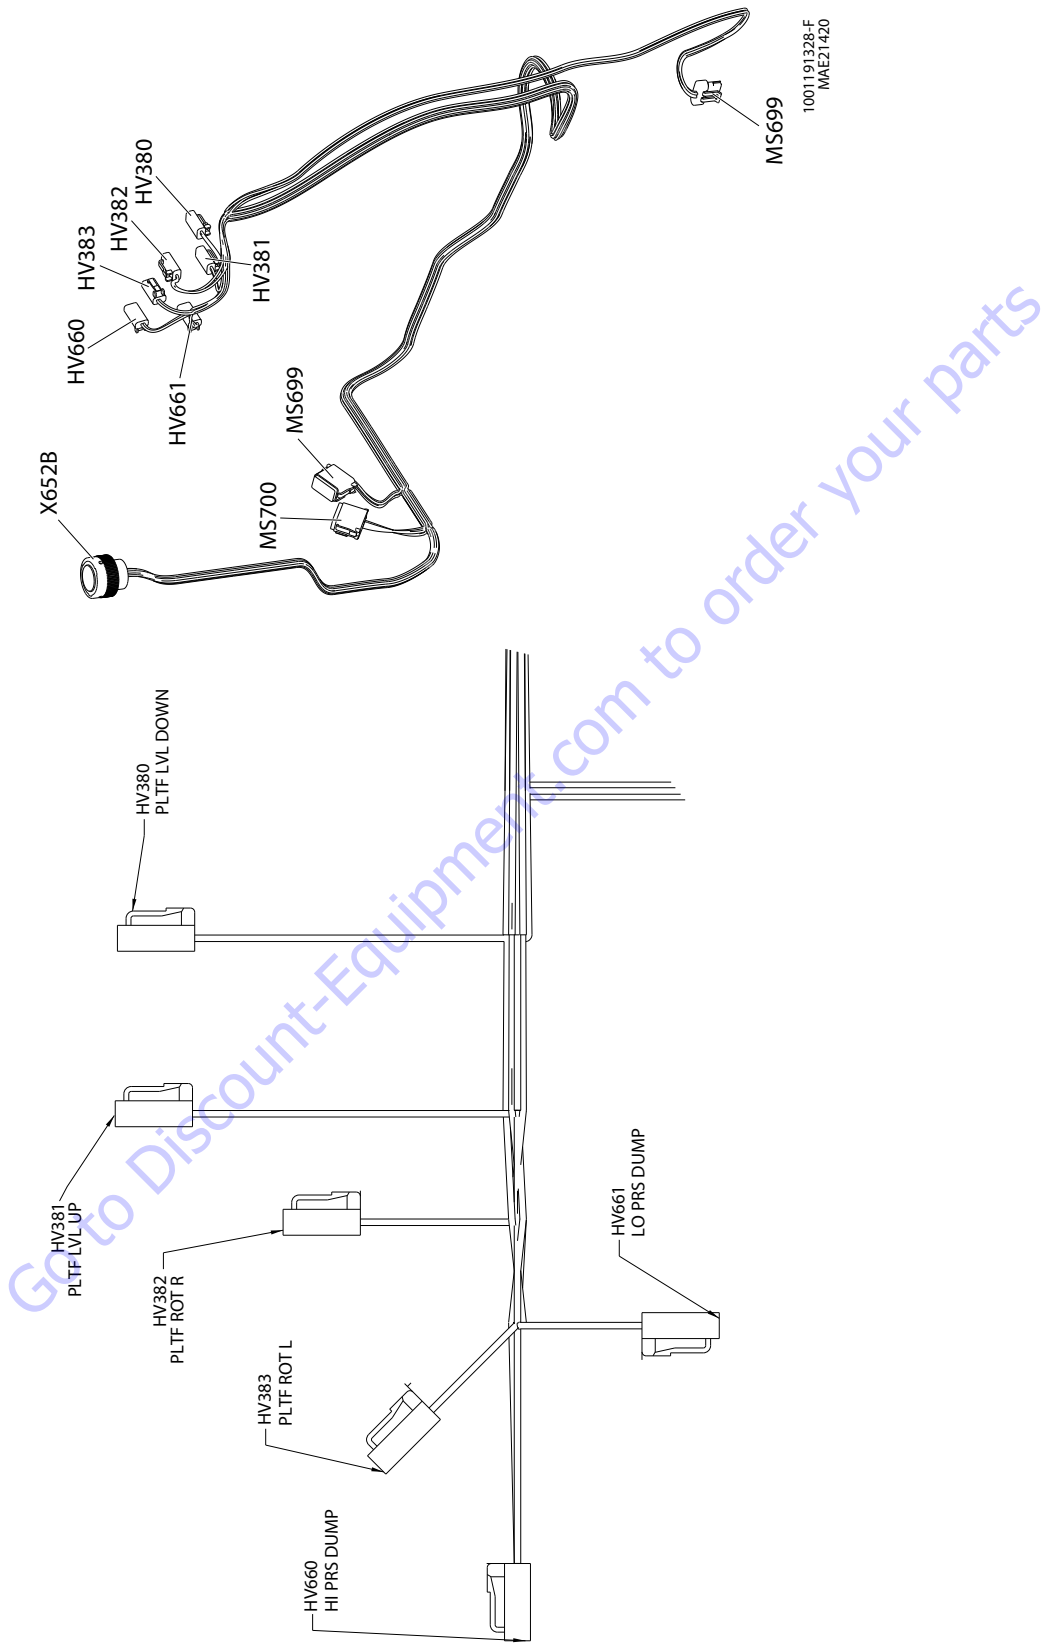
Platform Valve Harness - Sheet 2 of 2
